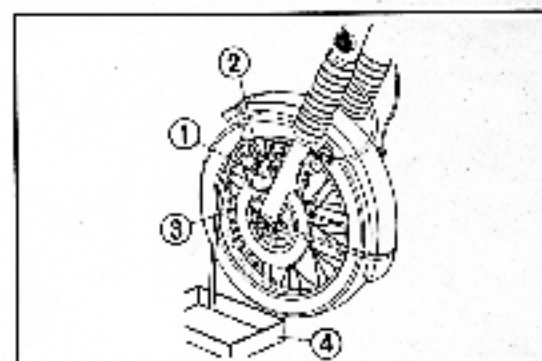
① Caliper ② Bleeder ③ Bleeder hose ④ Vessel
